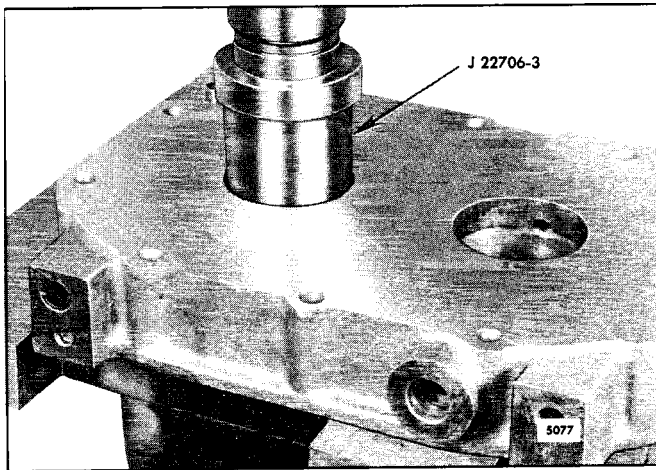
Removing Oil Seal Ring Collar and Bearing from End Plate using Tool J 22706-3
